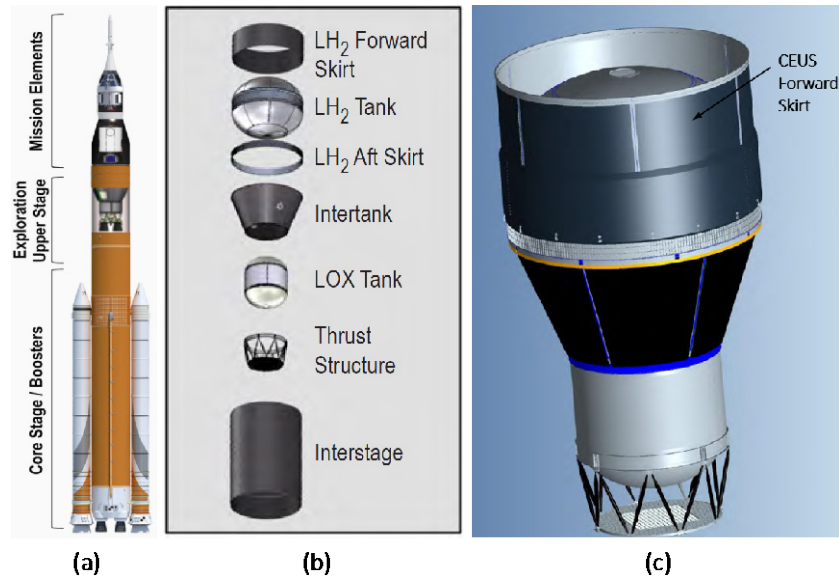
Schematics of (a) the SLS Block 1B configuration, showing the location of the Exploration Upper Stage (Ref. 7), (b) an exploded view of the Exploration Upper Stage (Ref. 6), and (c) an assembled view of the Exploration Upper Stage, showing the forward skirt location (Ref. 6).
